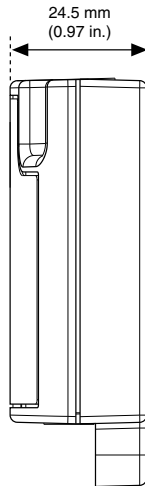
NI ELVIS RIO CM Dimensions, Front View
